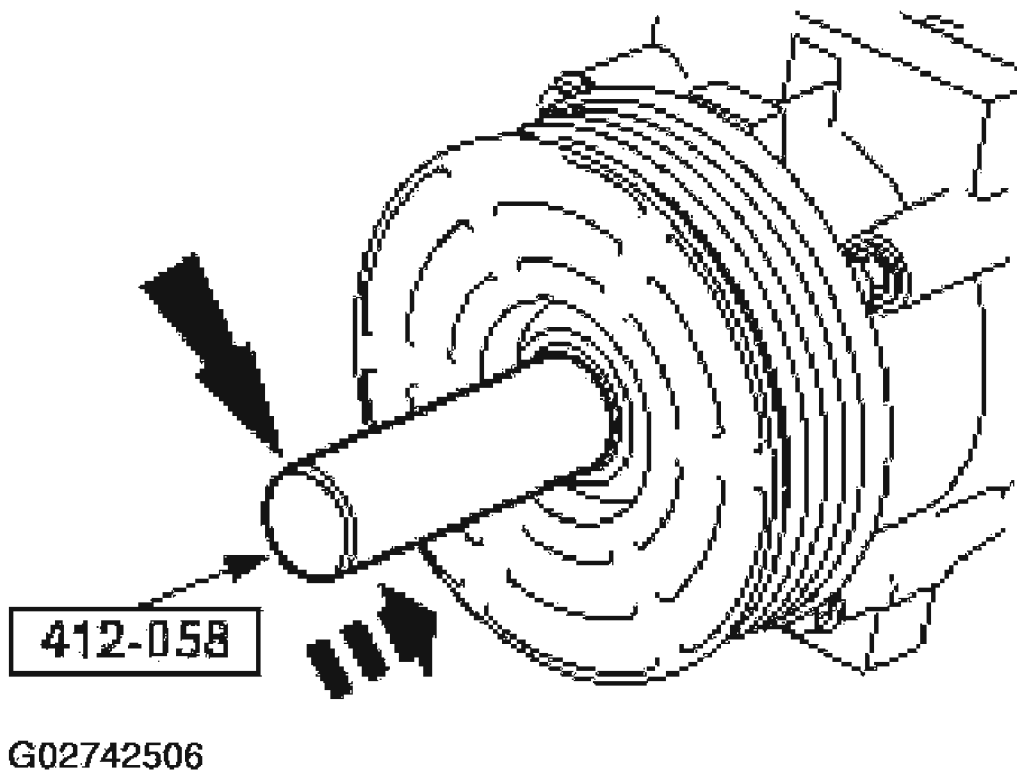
Lubricating Shaft Seal And Special Tool
